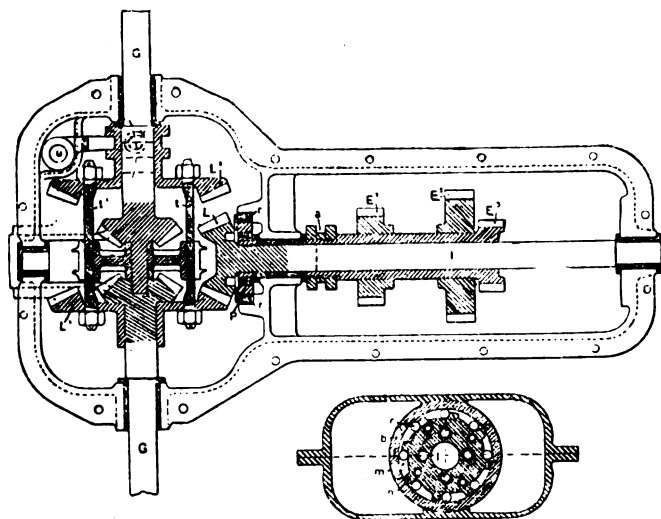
SECTIONAL VIEW OF VARIABLE-SPEED GEAR.—RAOUVAL CAR.
